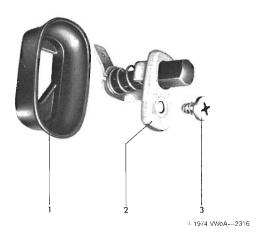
Door contact switch removal. Remove screw (3), withdraw switch (2), and disconnect wire. Seal (1) comes off along with the switch.
